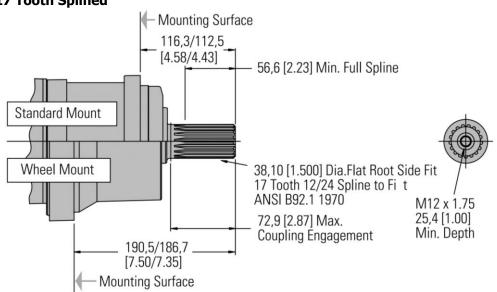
ISO 38.1 mm [1-1/2 inch] shaft
